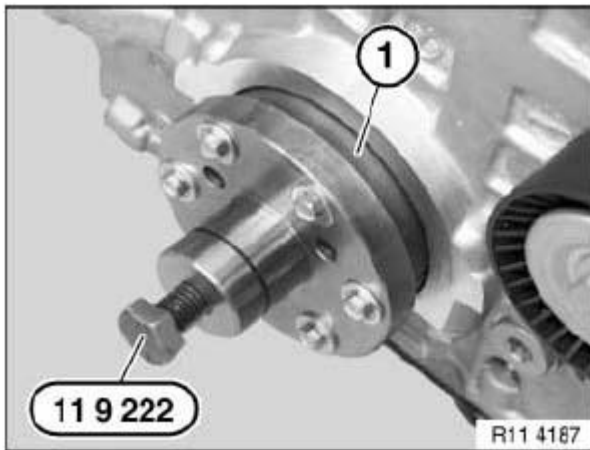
Identifying Special Tool (11 9 222) And Radial Seal
